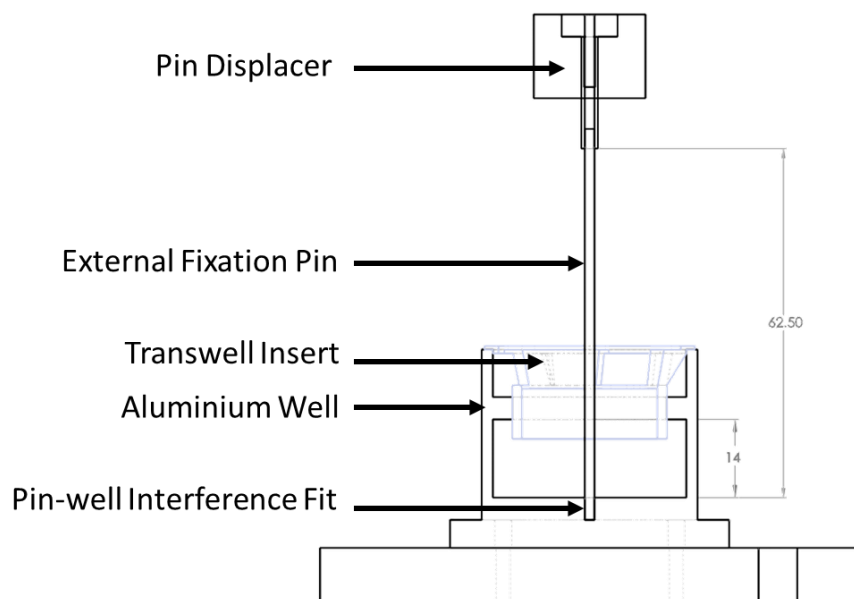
Diagram to illustrate how the pin machine and aluminium well fit together. Measurements of the pin length (62.50 mm) and distance from base to skin surface (14 mm) are shown
